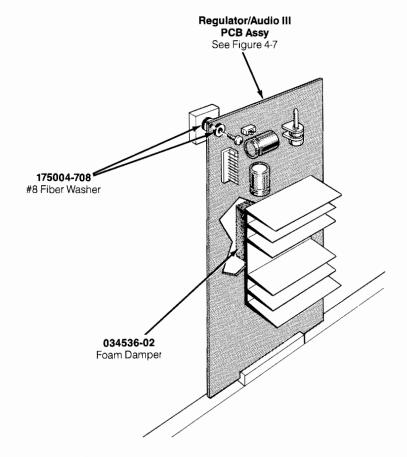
Printed-Circuit Board Mounting Hardware, continued
